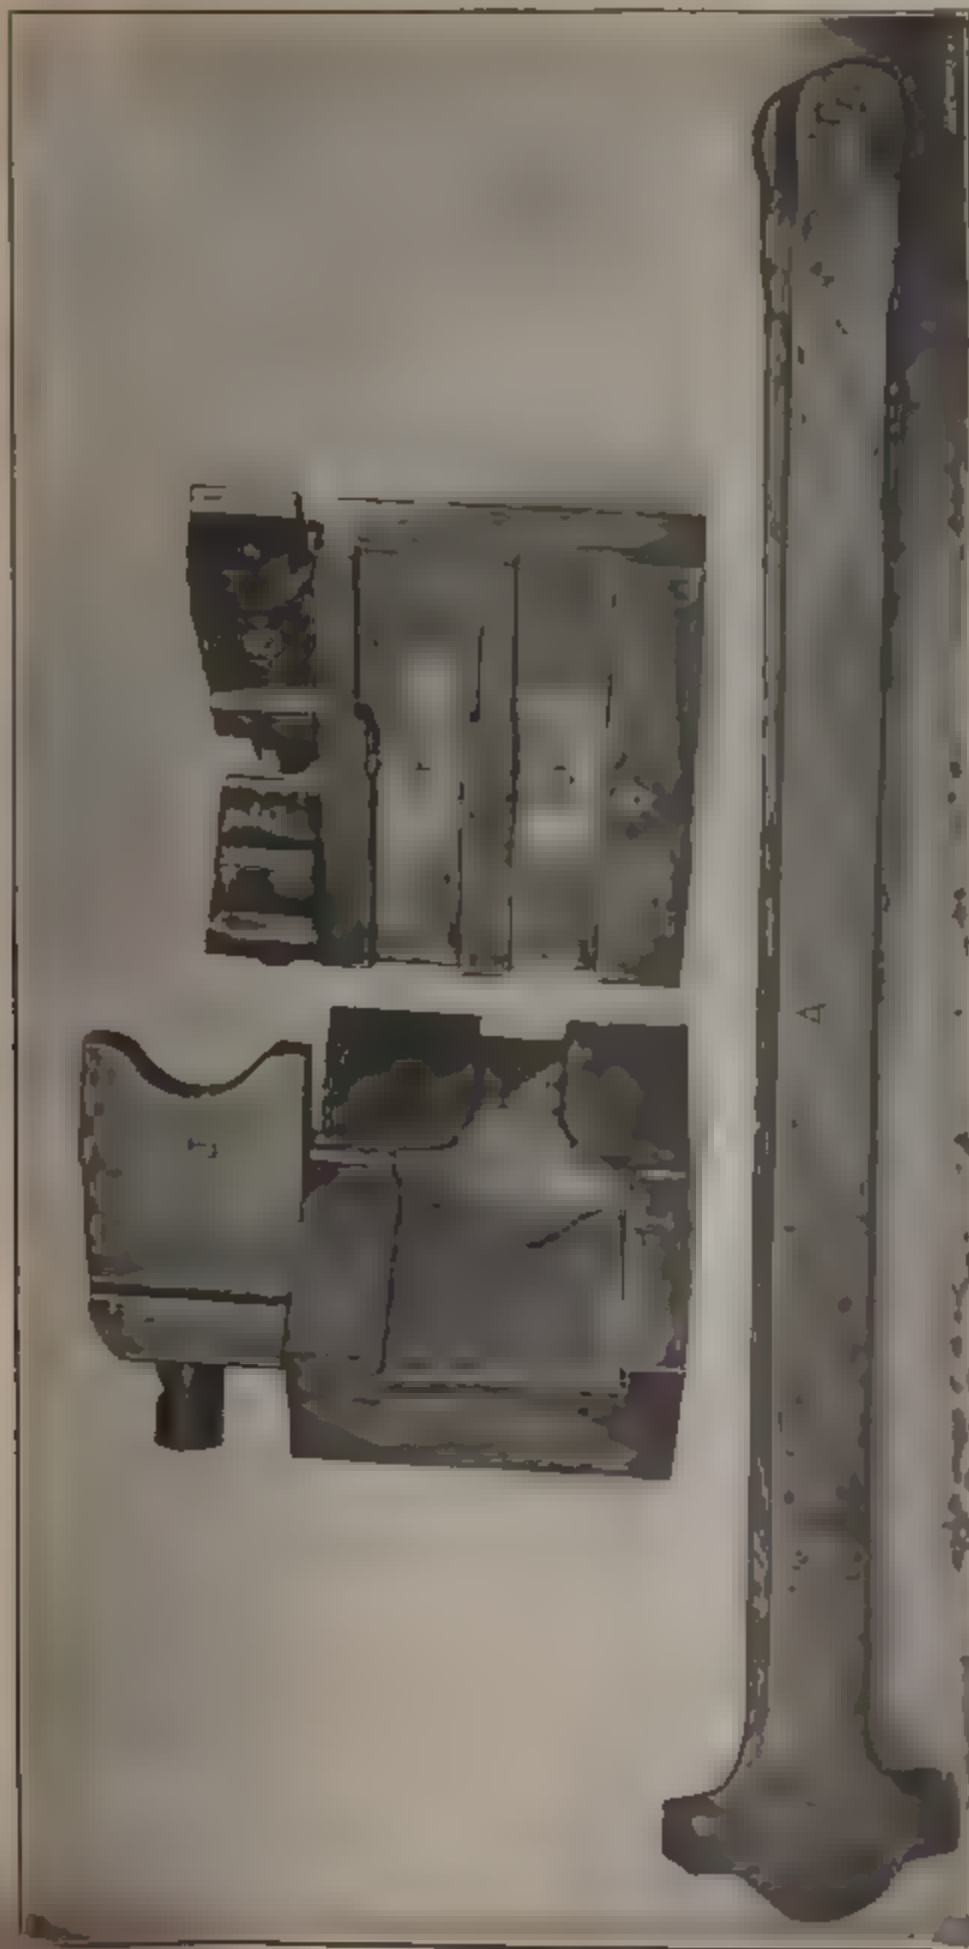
Dies and Tools used in the Ajax 8 inch Universal Forging Machine for making Locomotive Side Rods in the C & N W Railway Shops
